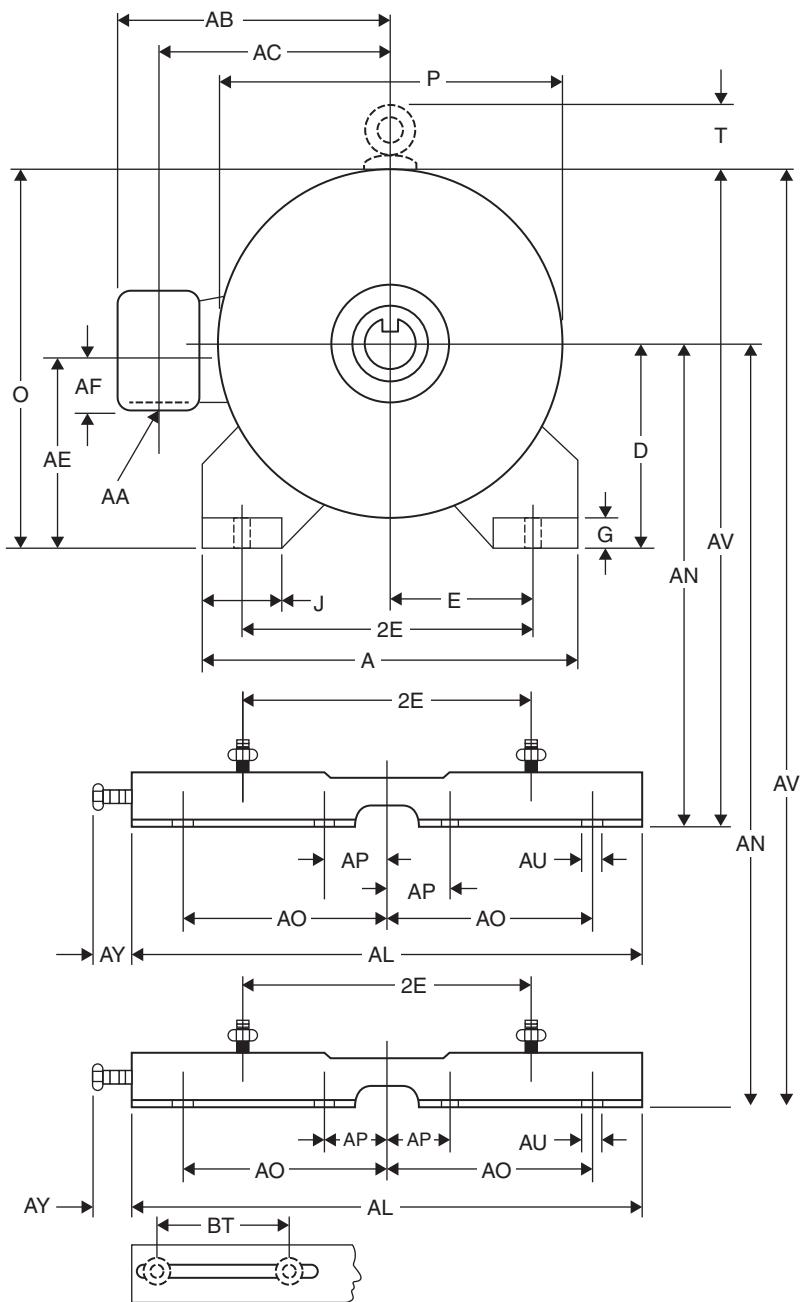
Standard designations for an open drip proof squirrel-cage machine—end view.
